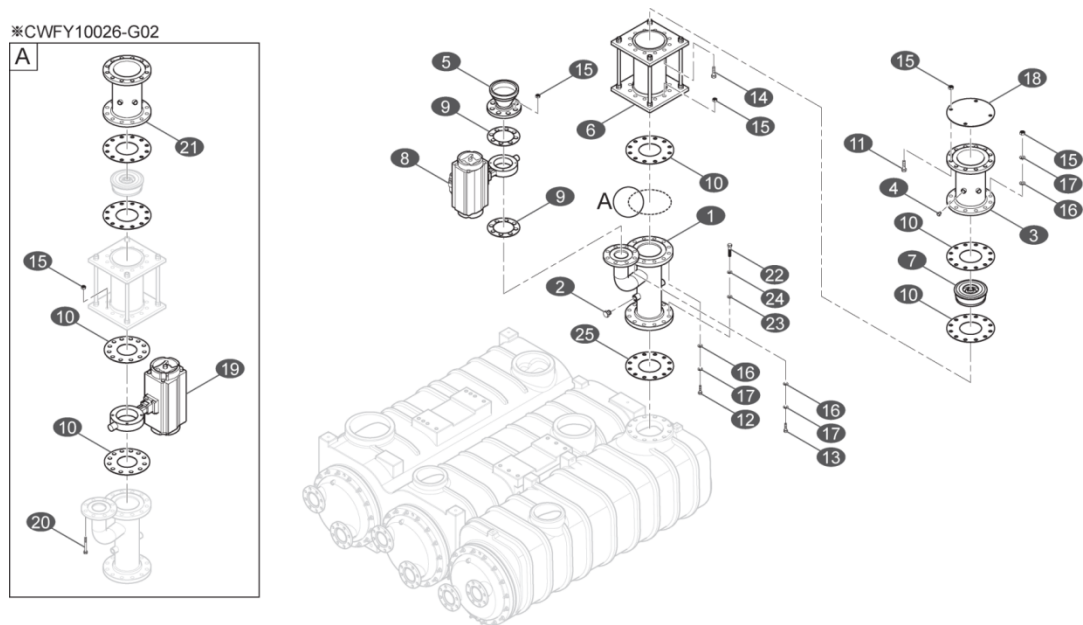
A/C Outlet Air Pipe (Type 1 & 2)
